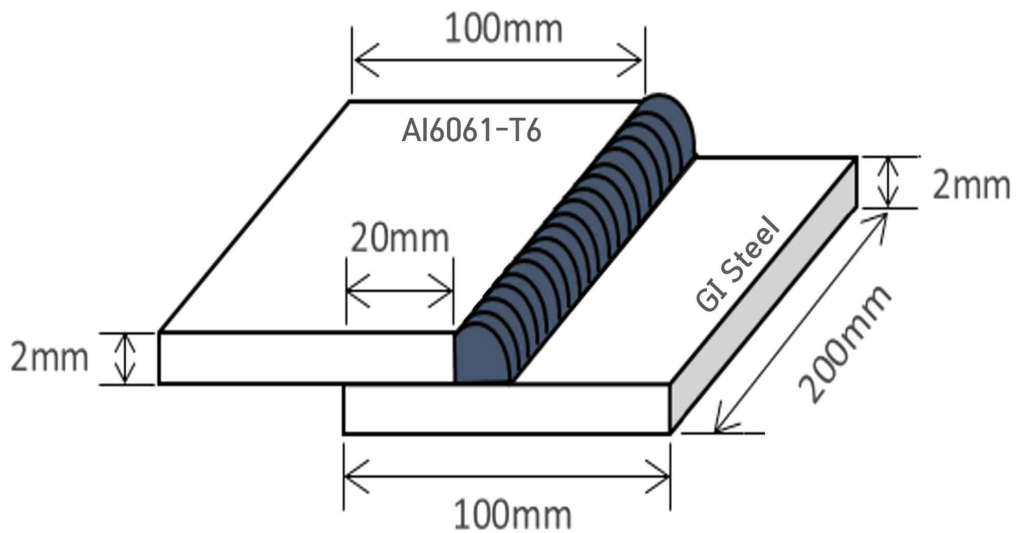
Schematic of Lap Jointed Al 6061-T6 to Galvanized Steel
